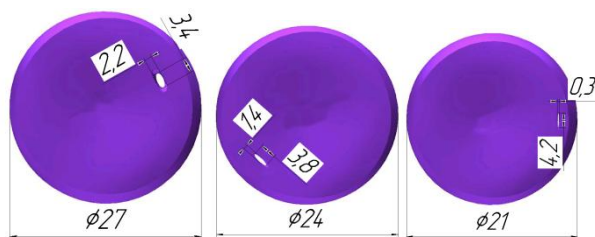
Workpiece with a defect in the peripheral zone
